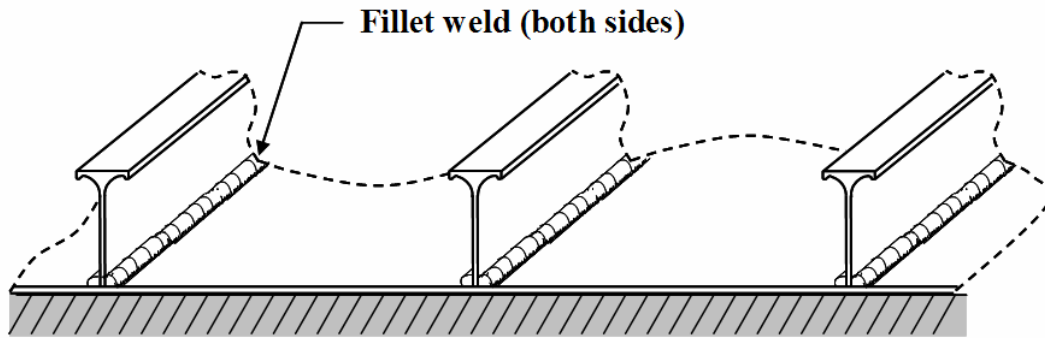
Schematic of fillet-type fusion weld (Fabrication method A)
